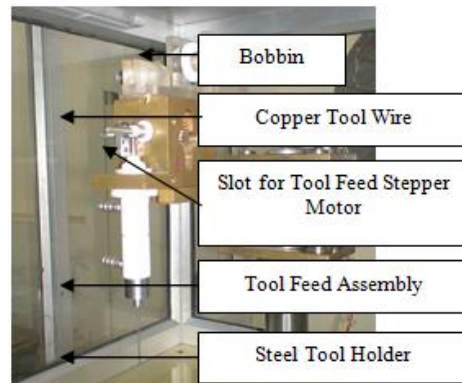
Photograph of tool feed assembly mounted on Z axis assembly
